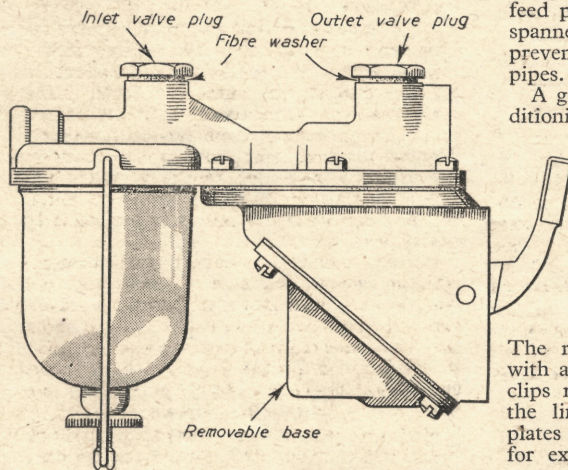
The two valve plugs have to be removed to gain access to the valve assemblies. Note also the position of the removable plate. On some models, however, this is on the base of the body.
